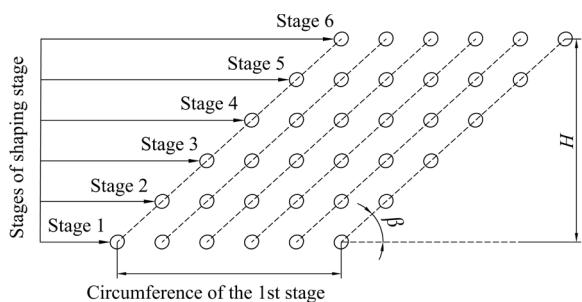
Side unfolded drawing of spirally arranged balls on the shaping stage
